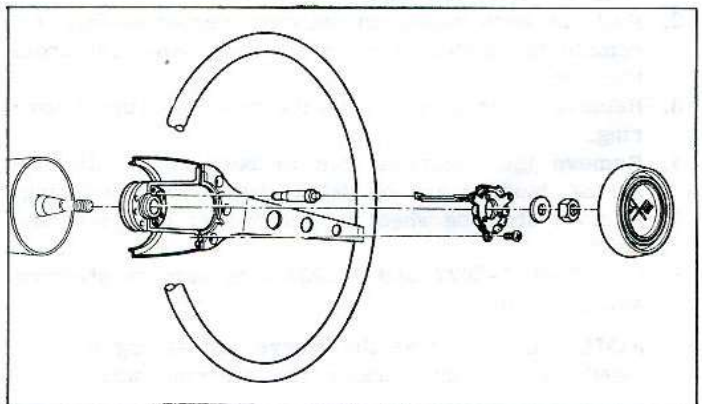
Simulated Wood Steering Wheel and Attaching Parts
